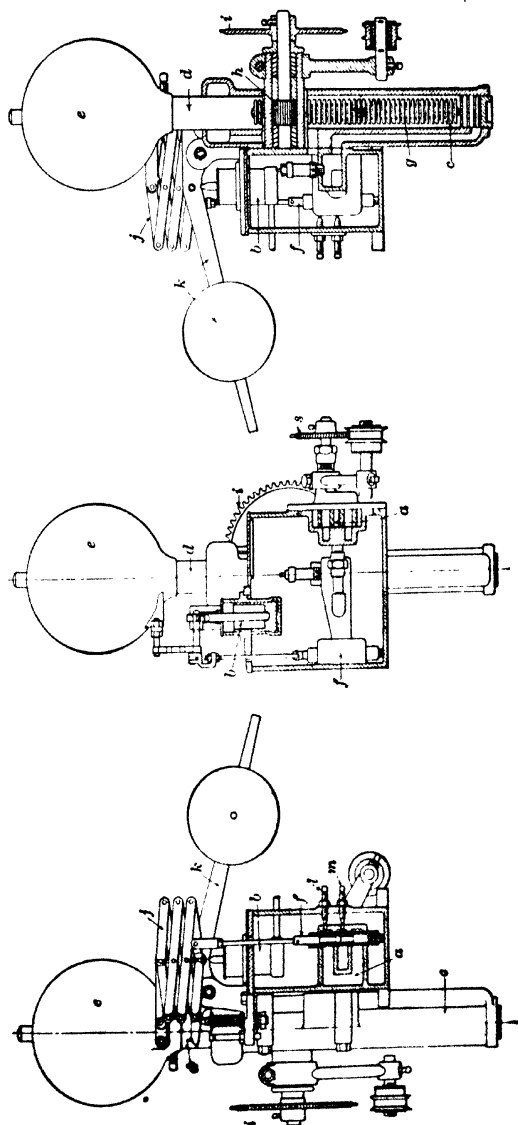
Details of Ingersoll-Rand "XPV" Automatic Air Governor
